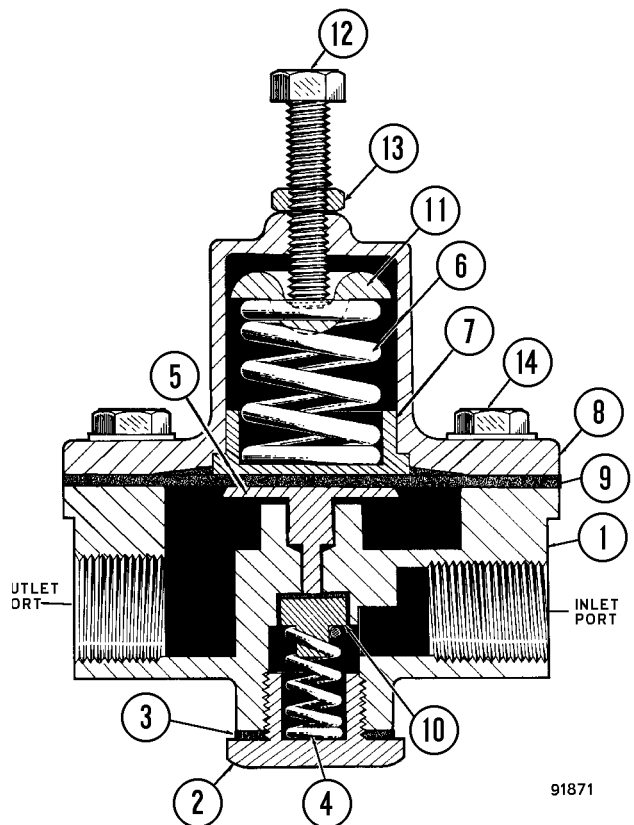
90 PSI (622 KpA) REGULATING VALVE
